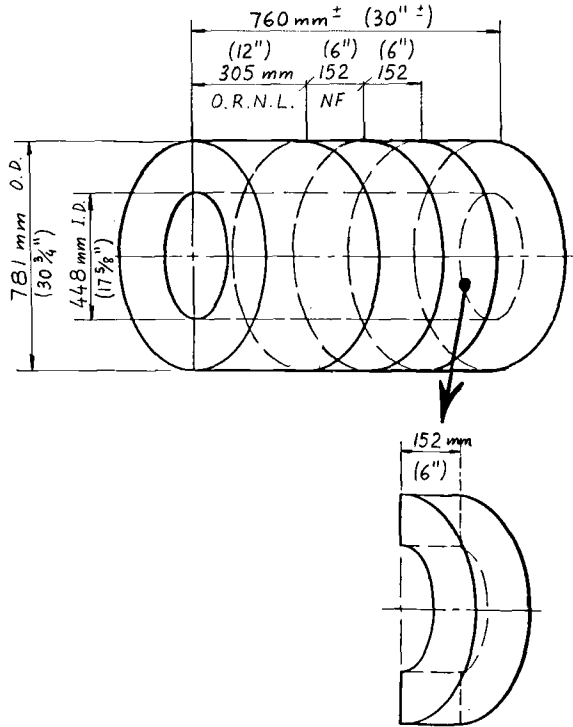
Sketch of the layout of our specimen as located in the saddle forging (received from National Forge Co.).
